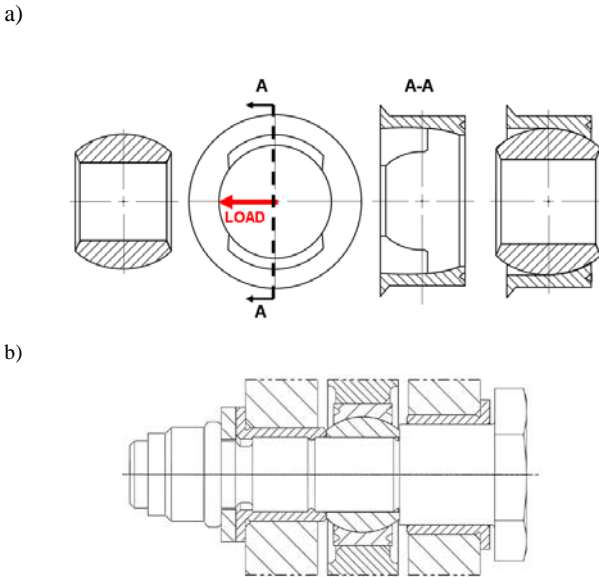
Loader spherical bearing: a) Spherical ball and outer race with loader slot, b) Example arrangement of loader slot bearing
